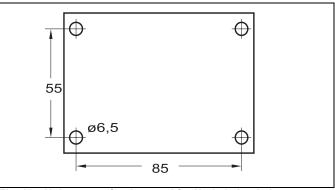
Hole pattern for the stand for U 4851 circulating pump
